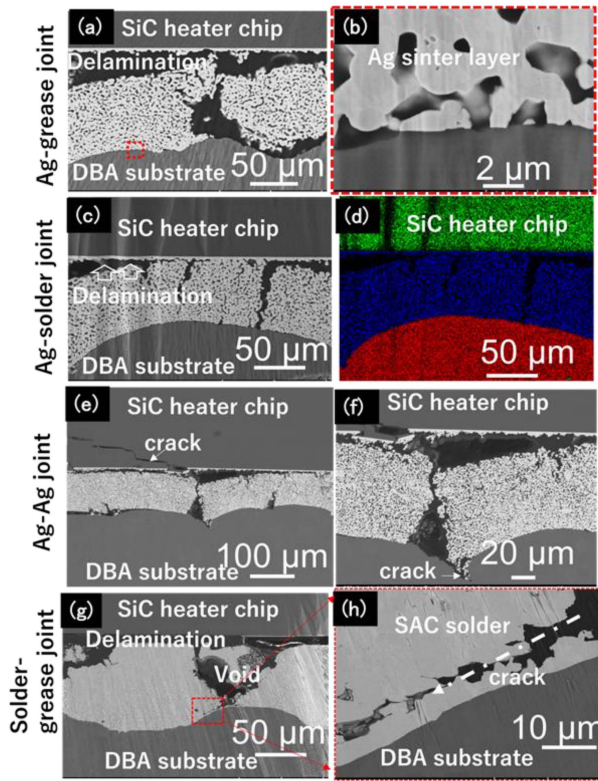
Cross-sectional SEM image of the four kinds of SiC/DBA/Al heatsink joint structure after power cycling test at die attach part. (a), (c), (e), and (g) Ag-grease joint, Ag-solder joint, Ag-Ag joint, and solder-grease joint structures, respectively. (b), (d), (f), and (h) Local magnified view or EDS element mapping corresponding to (a), (c), (e), and (g), respectively.
